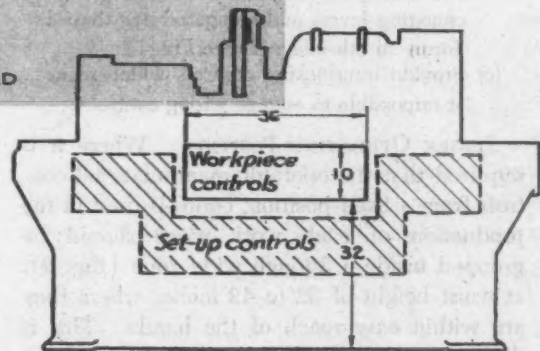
Below — Typical arrangement of controls on a machine which is handled by the operator from a fixed position
